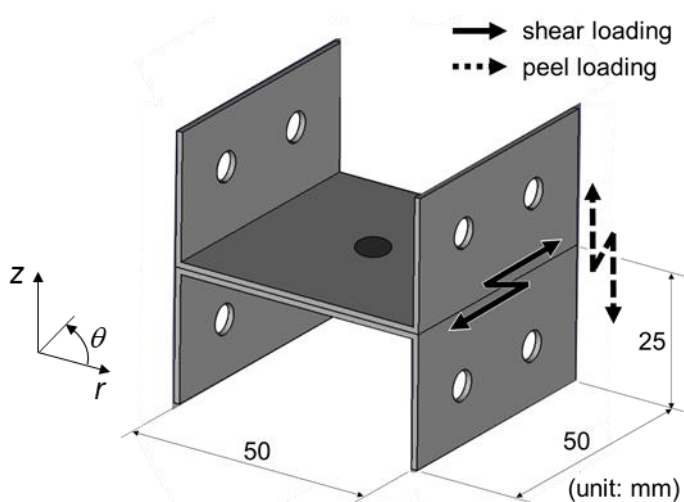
Dimension of fatigue test specimen and load direction.
